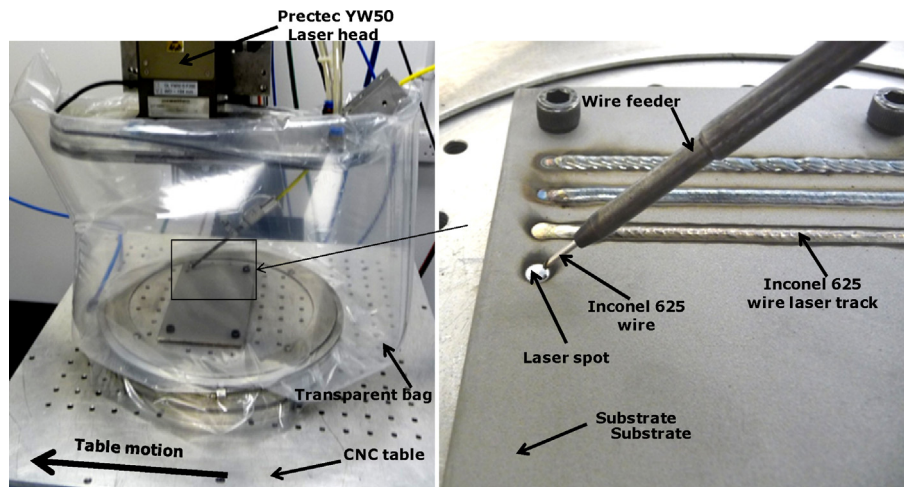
Experimental arrangement for Inconel 625 wire laser deposition.
